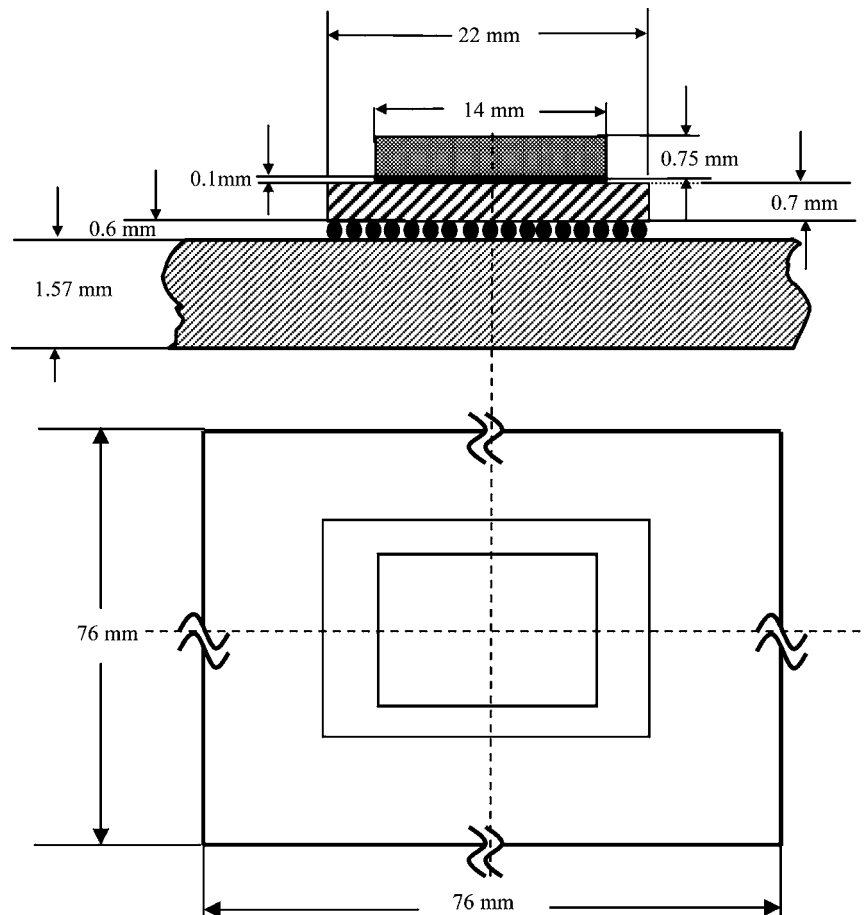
119 (7×7) BGA I/O FC-PBGA—front view and top view
